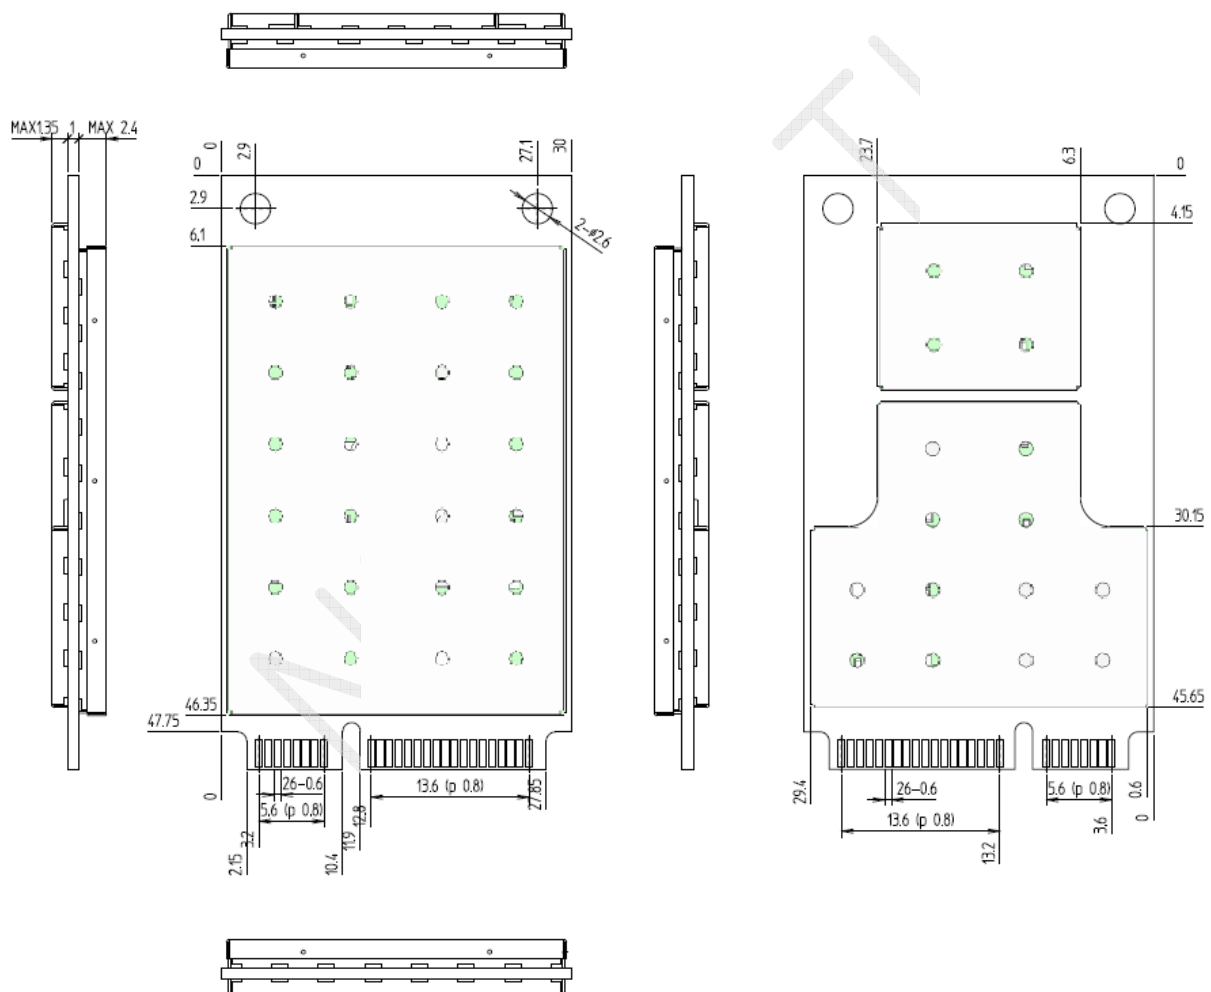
SCF-V01 Mechanical Dimension (Top View)
